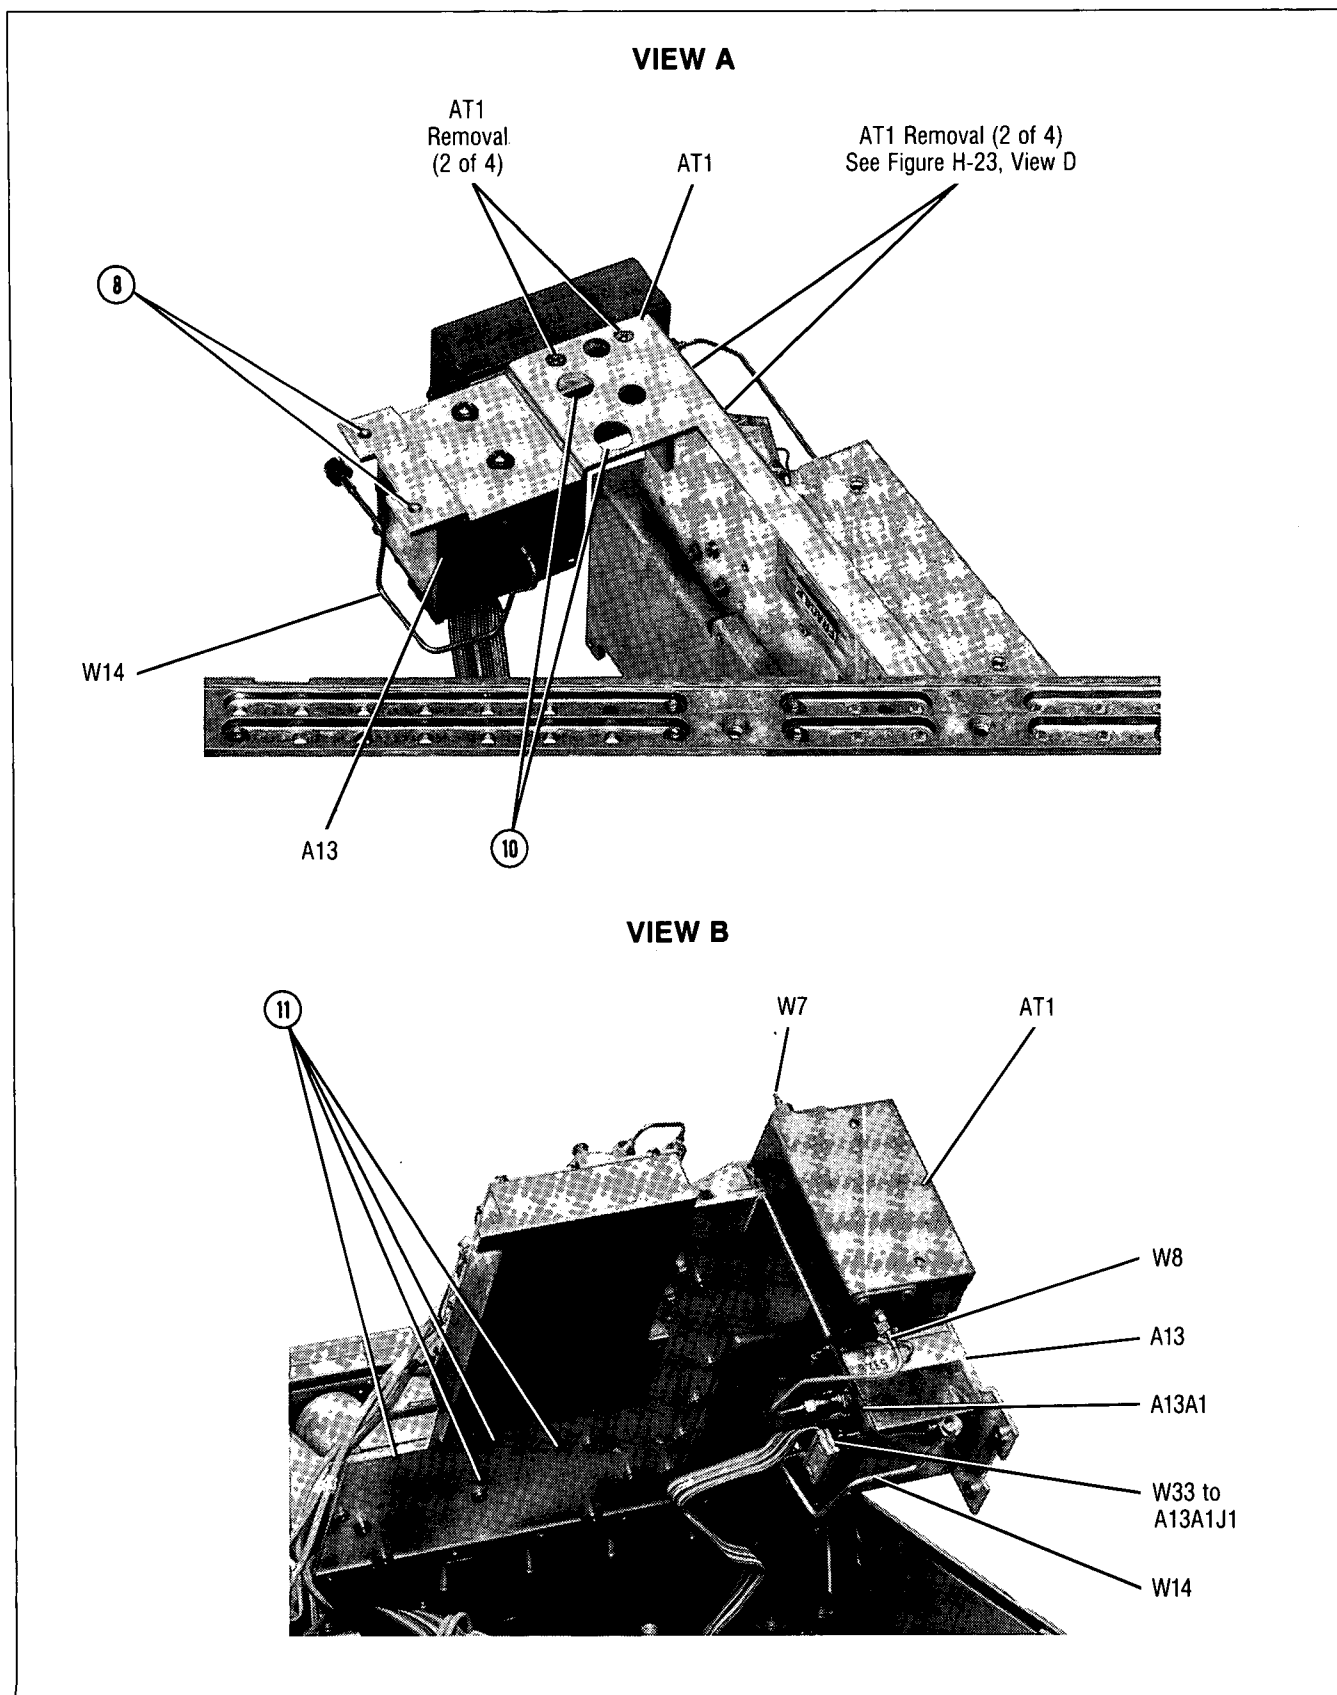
A13, A13A1, A16, A18, and AT1 Assemblies, Cables, and Mounting Hardware Location
